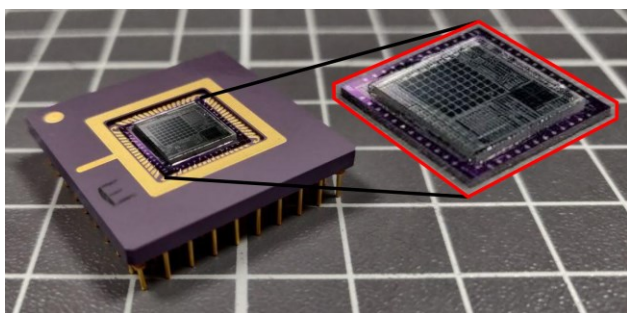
Packaged device after adhesive bonding of the transparent spacer. The inset shows the bare chip after adhesive bonding and before packaging.
